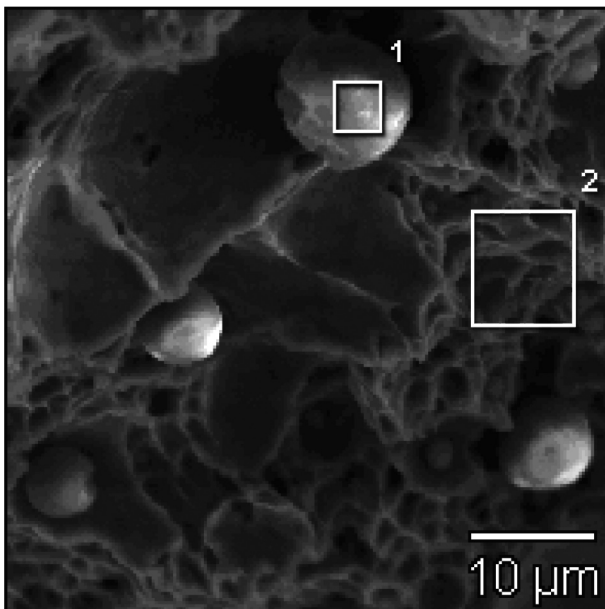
Big oxide inclusions in weld, the oxygen amount (740 ppm)
